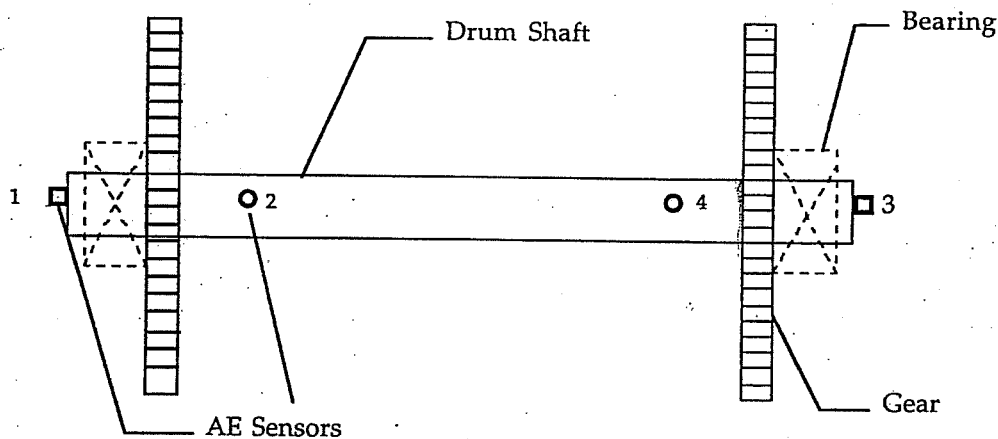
Schematic Layout of AE Sensors on the Drum Shaft
